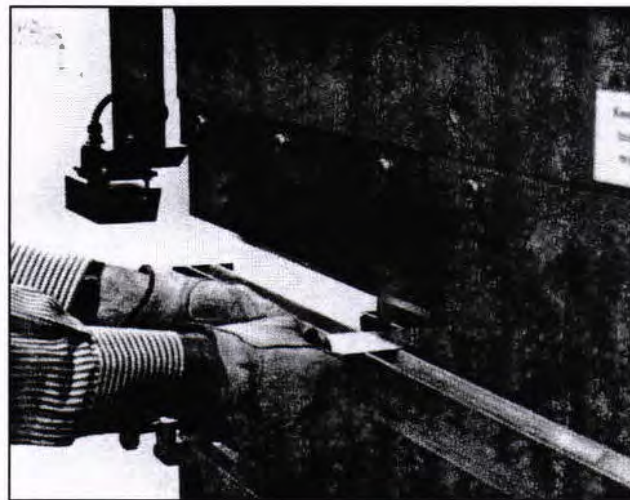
Aluminum sheets cutting under press cutter machine
